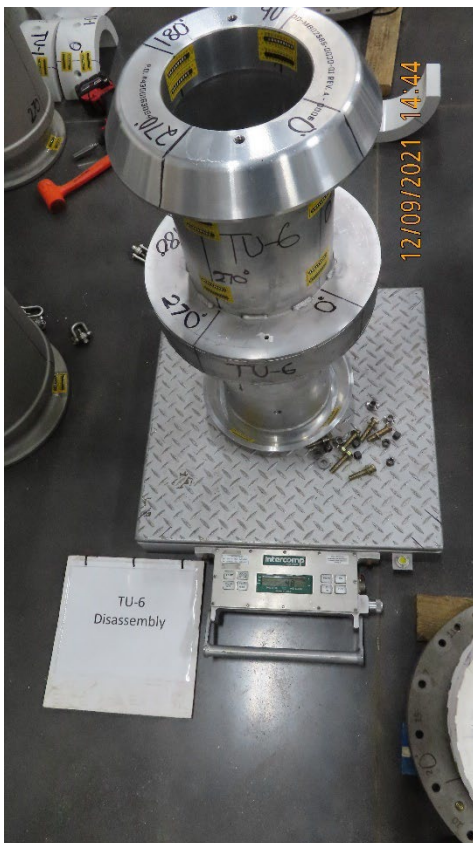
TU-6 weldment PCC pads weighed.
